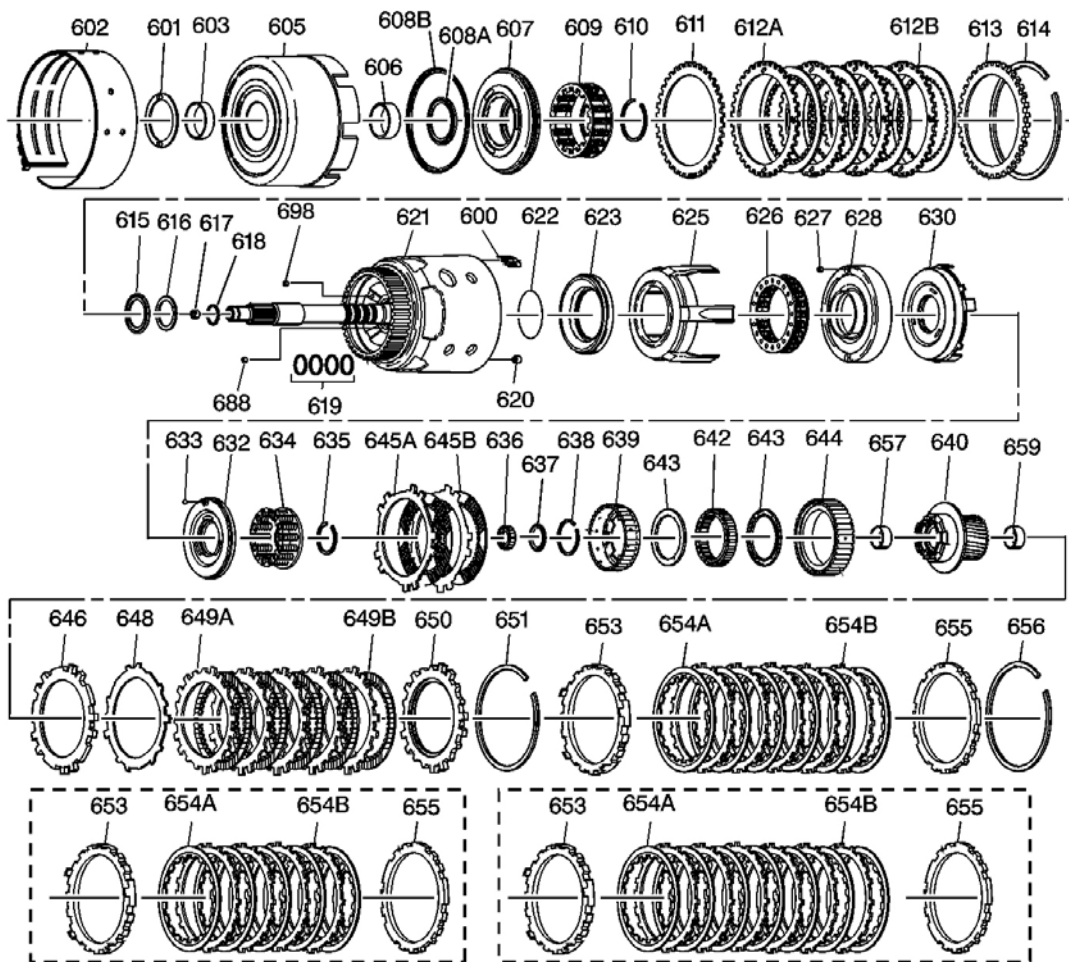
Internal Parts Disassembled View (1 Of 2)
